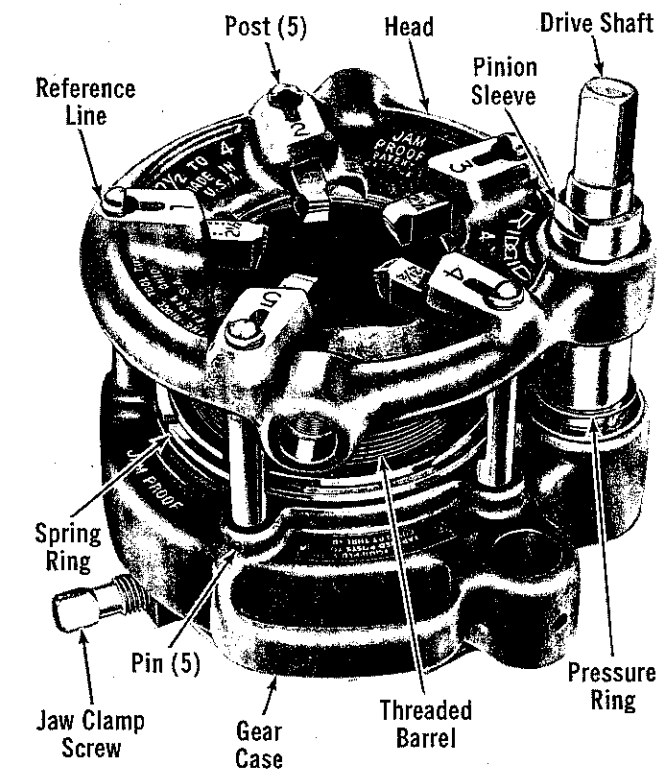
No. 4PJ Geared Threader with Drive Shaft Up.
